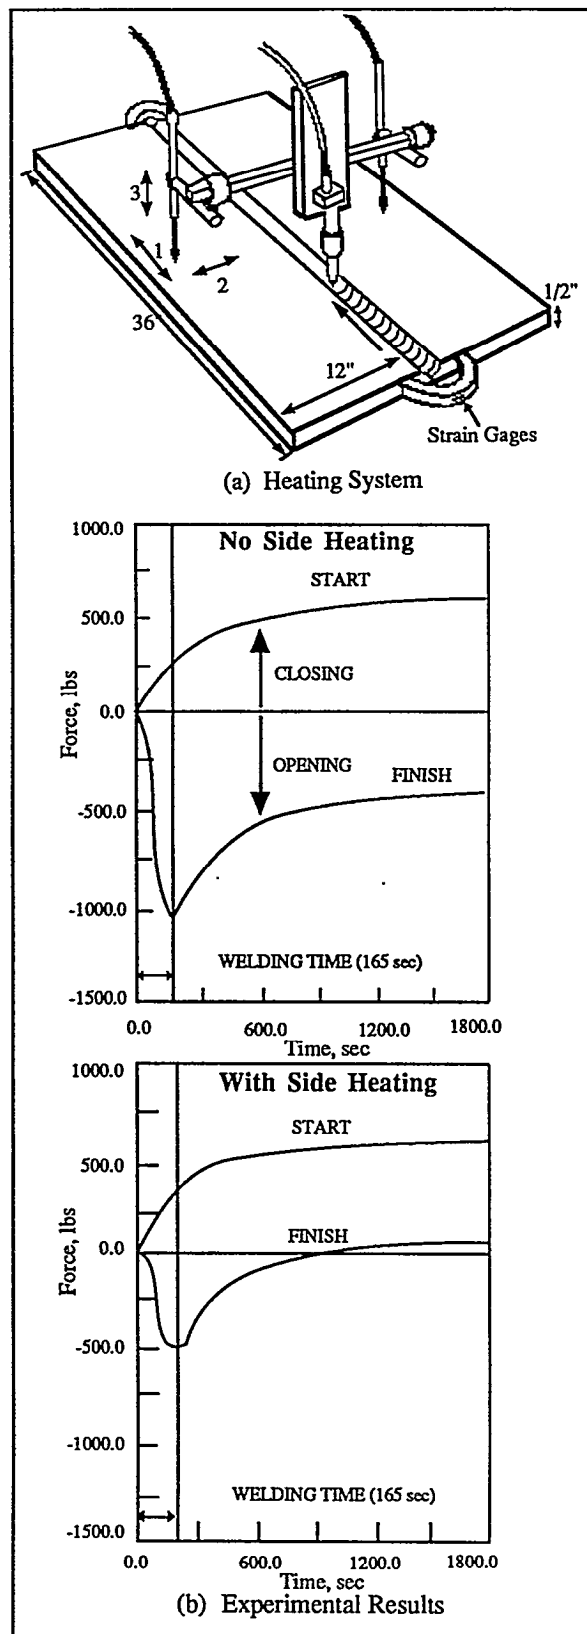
Reduction of Forces Acting on the Rings Attached to Starting and Finishing Ends of a Butt Weld
